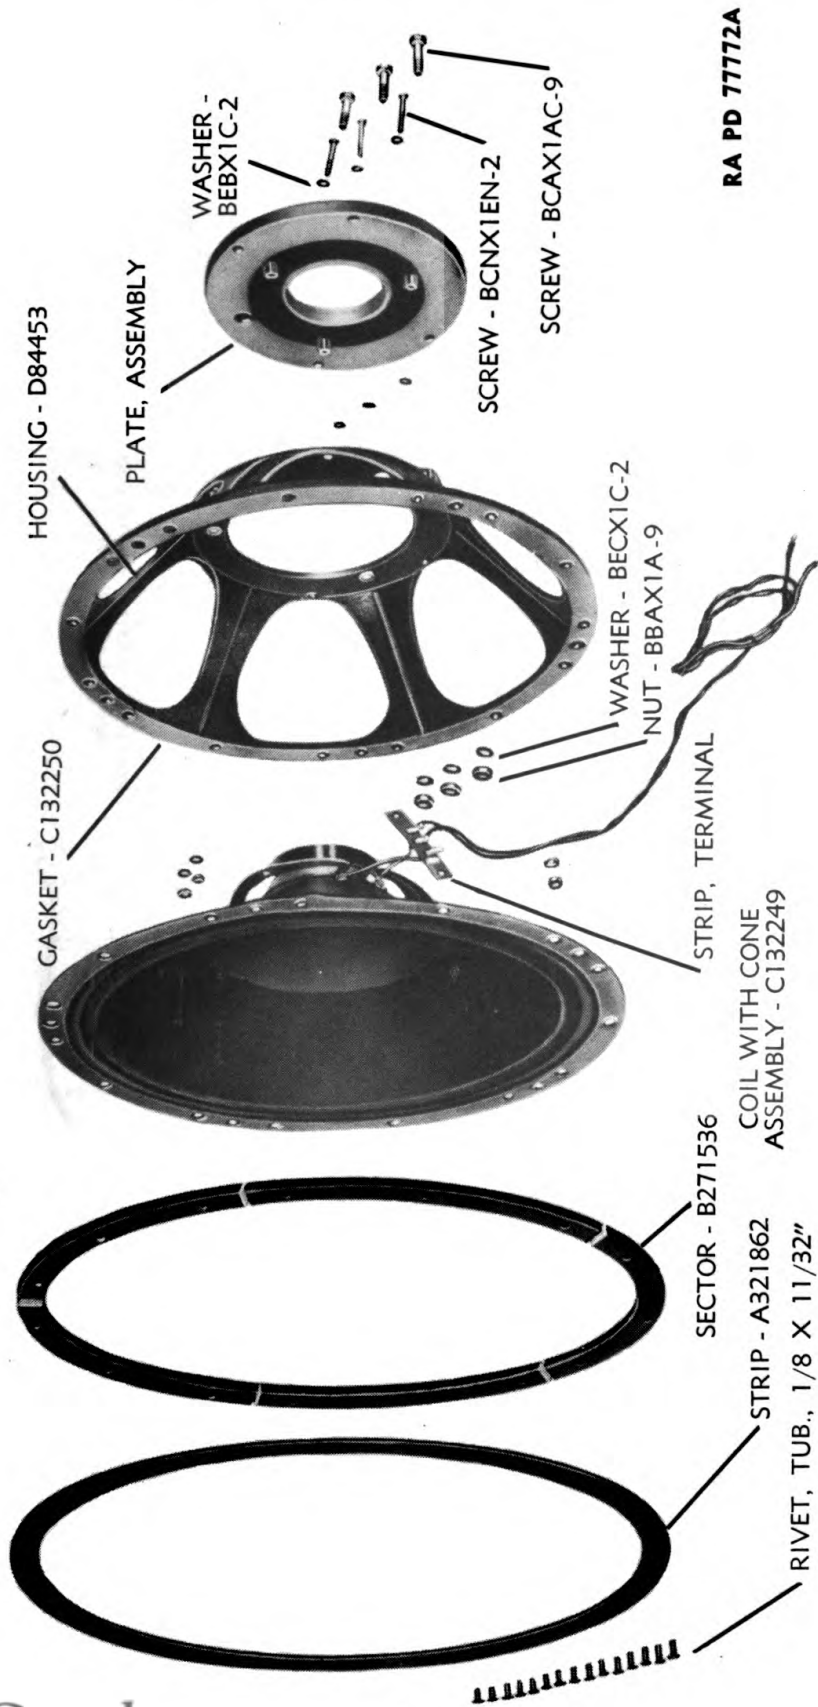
Removal of Field Coil Housing and Related Parts From Gun Sound Speaker
